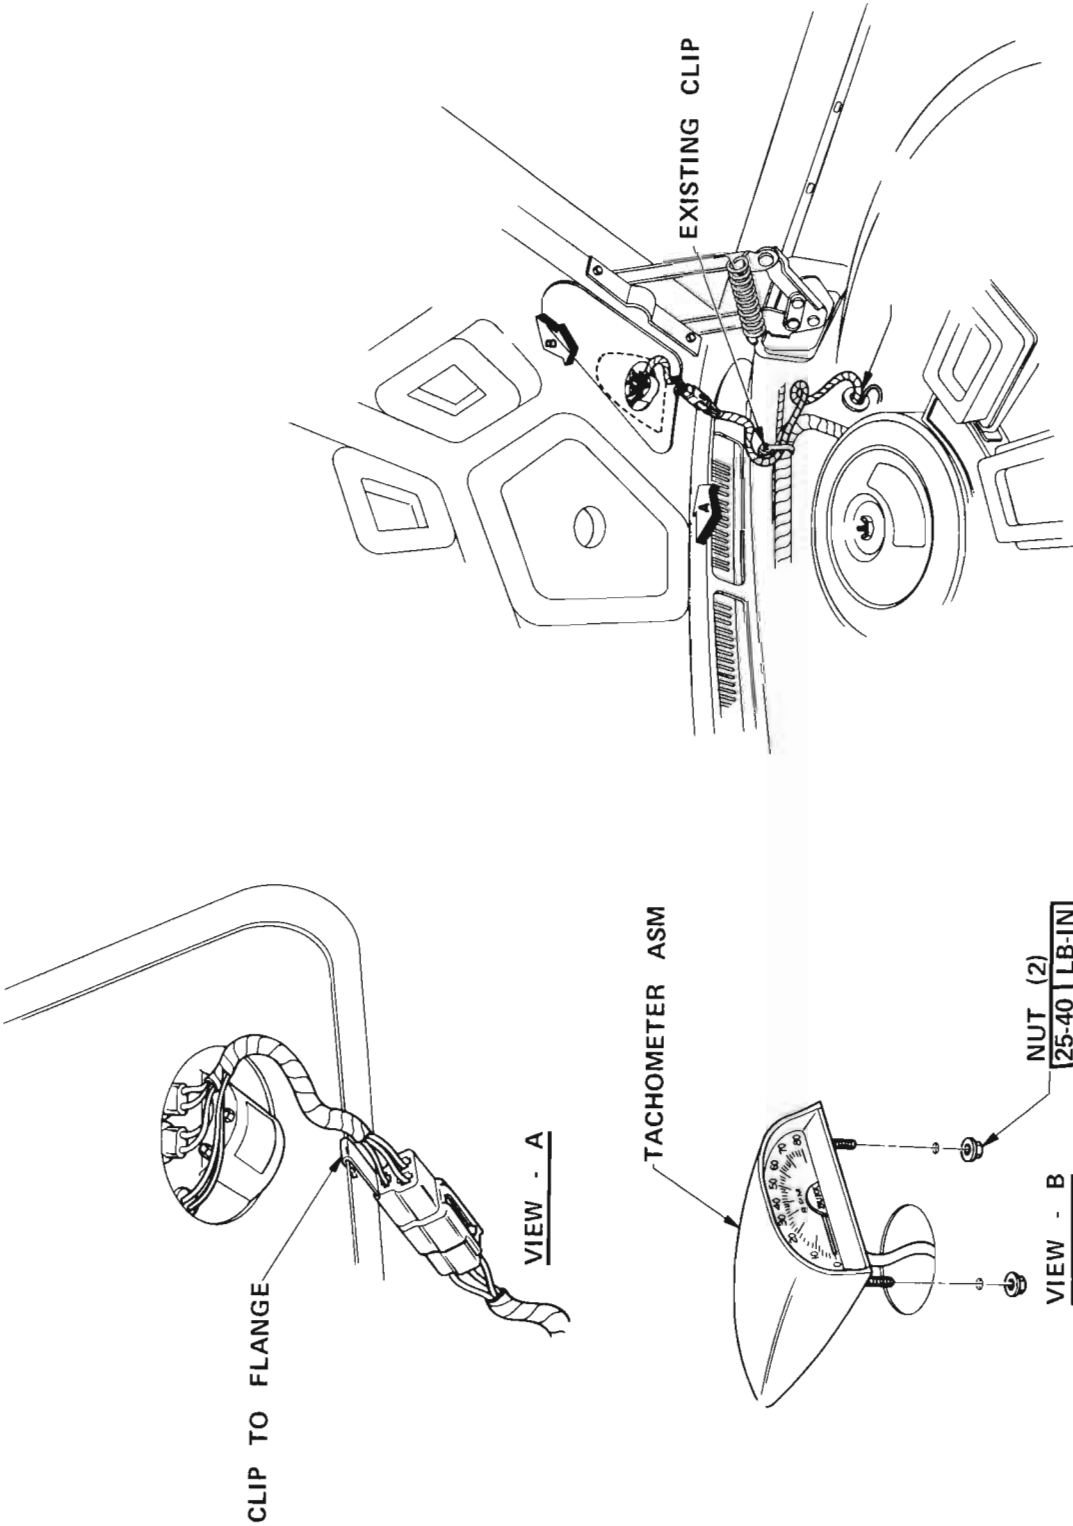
Hood Mounted Tachometer - 43000 Series
